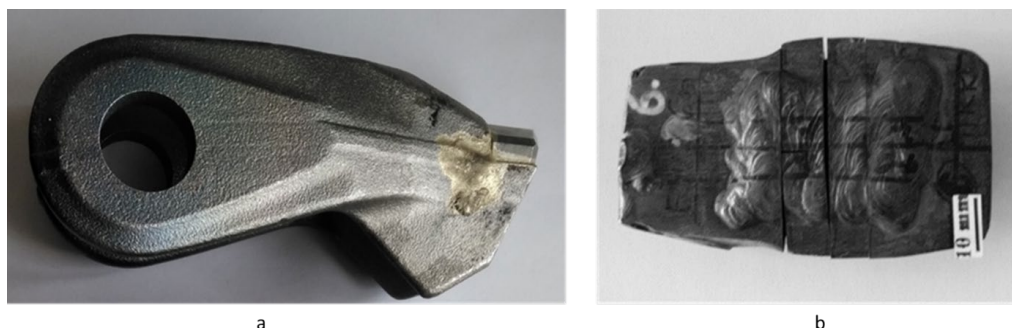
New tool (a); specimen with hardfacing materials - example Electrode E DUR 600 (b)
